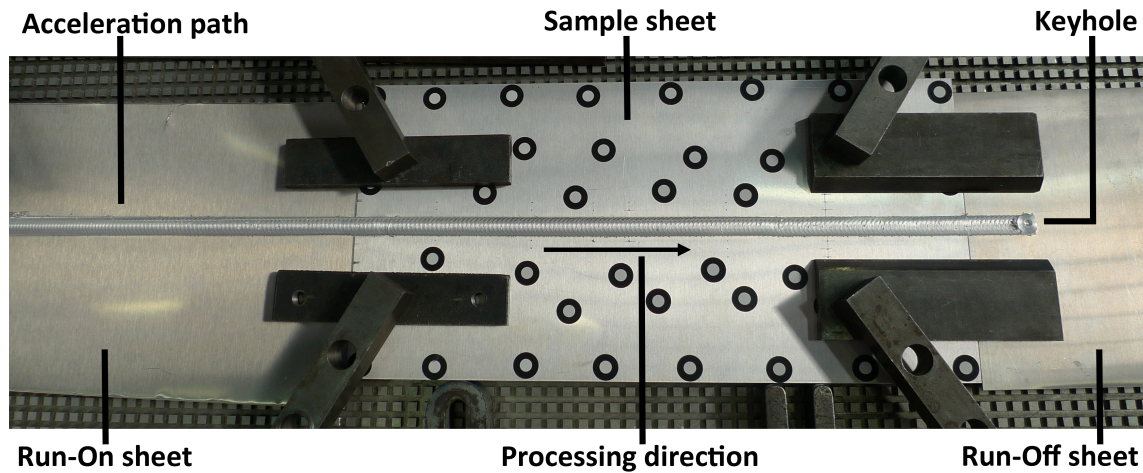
Clamping setup for FSP including the acceleration path on the run-on sheet, the sample sheet from which the specimen have been extracted and the run-off sheet with the keyhole.
